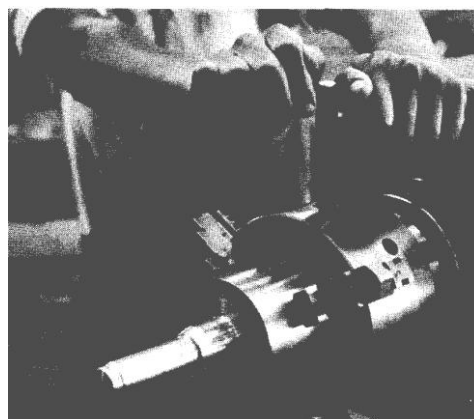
Tools and workpieces must be rigidly supported for safety.
